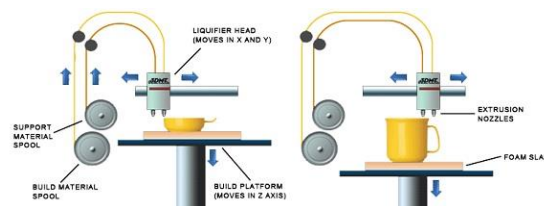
Working Principle of FDM 3D Printer (courtesy: 3DMT)
